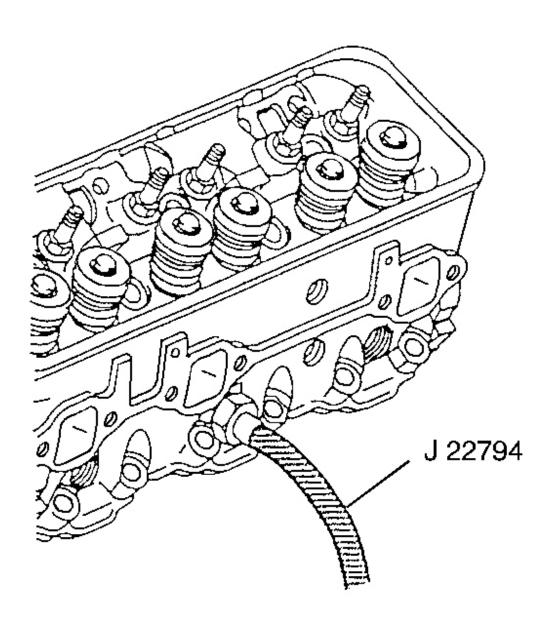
Compressing Valve Spring (Cylinder Head Installed) Using Special Tools Courtesy of GENERAL MOTORS CORP.
